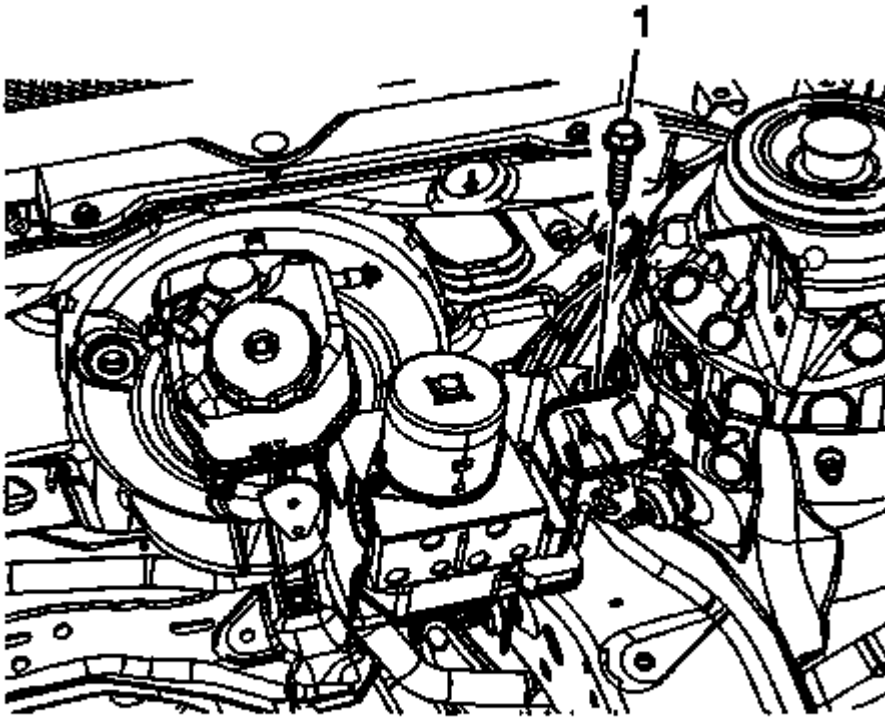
Brake Pressure Modulator Valve Assembly Bolt
